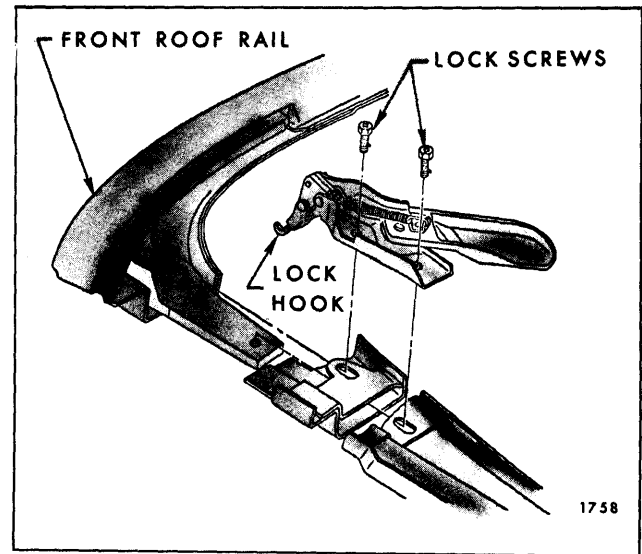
Front Roof Rail and Lock Attachment - "Z" Styles
